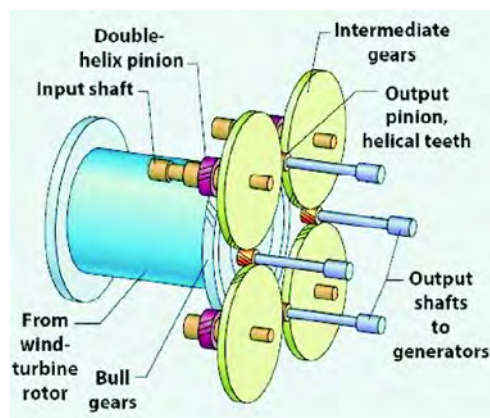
Single Gearbox with Variable Speed Four-PMSG WPP: The 2.5 MW divides the performance flow in the gears, thereby reducing the loads on the shafts.
